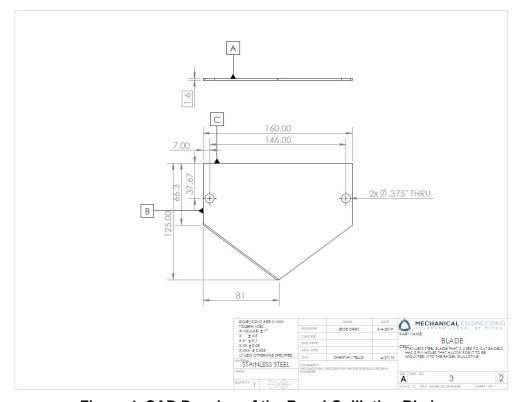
CAD Drawing of the Bagel Guillotine Blade
